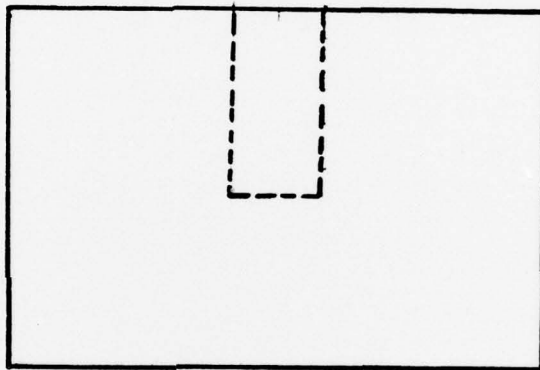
Machine Blank for 2nd Blow of Phalanx Penetrator.
